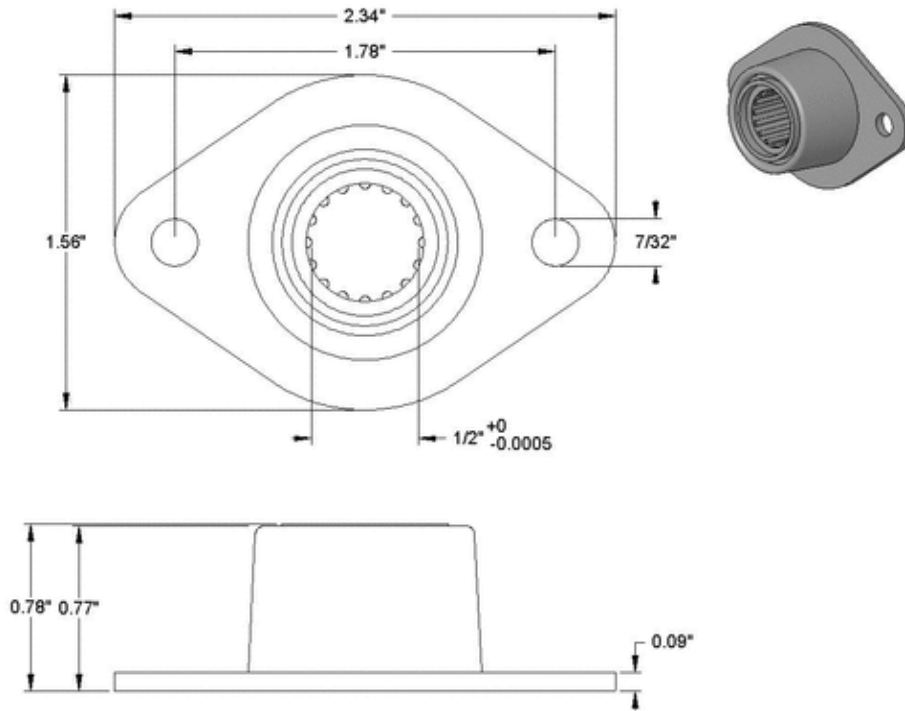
Dimensions of needle bearing in current momentum wheel assembly (From [50])
